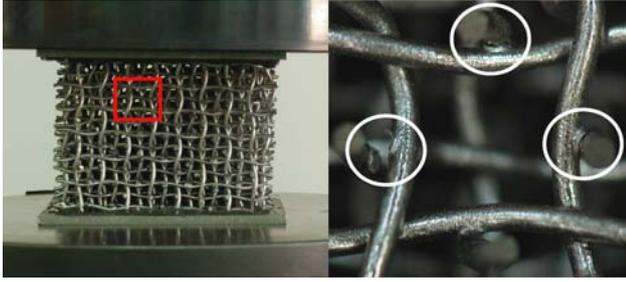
The failure occurred in the brazed parts at each cross wires.
